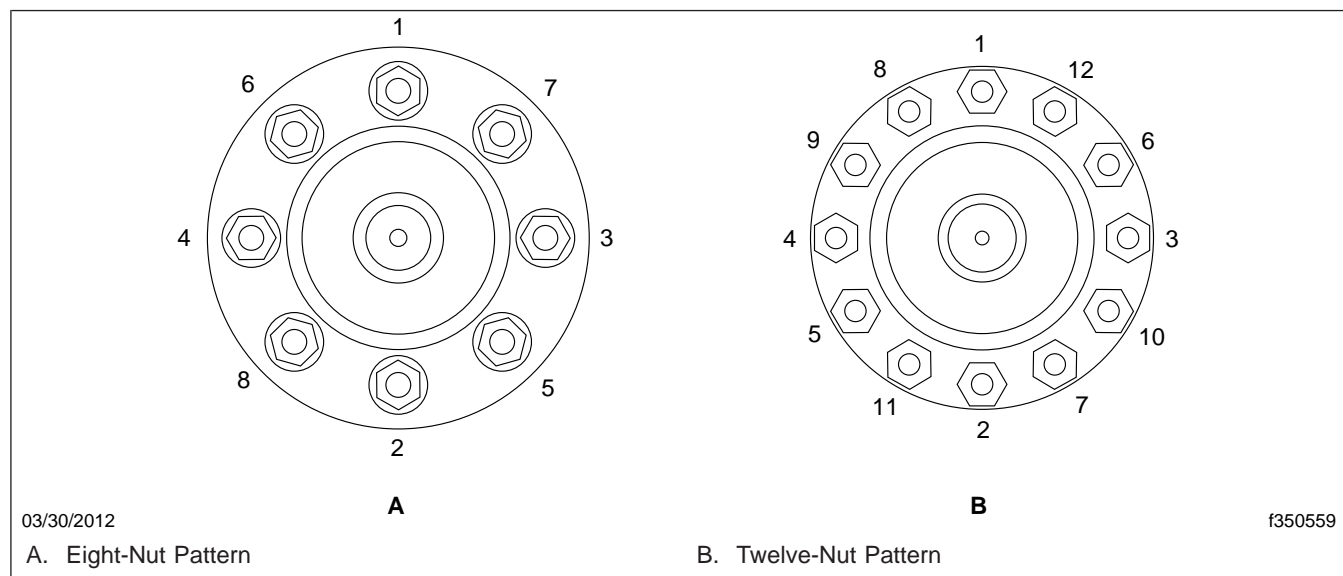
, Tightening Sequences, Axle Shaft Flange Nuts
